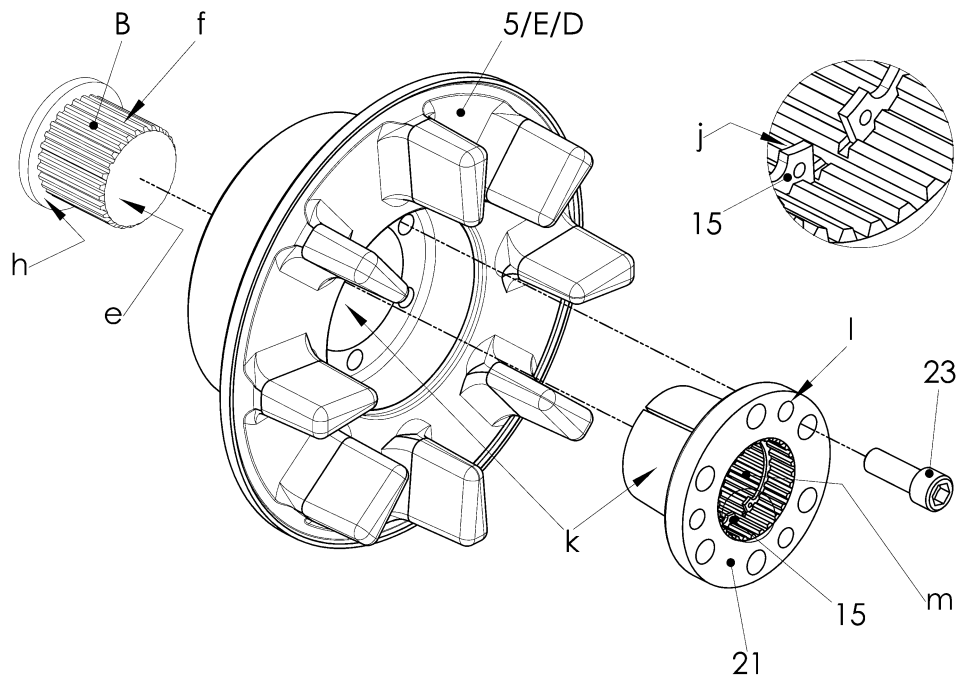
Mounting the inner part (5/E/D) with CENTA-conical clamping
